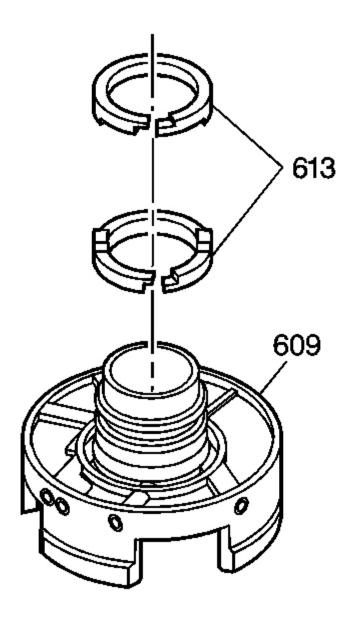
Installing Second Clutch Housing Oil Seal Rings Courtesy of GENERAL MOTORS CORP.
